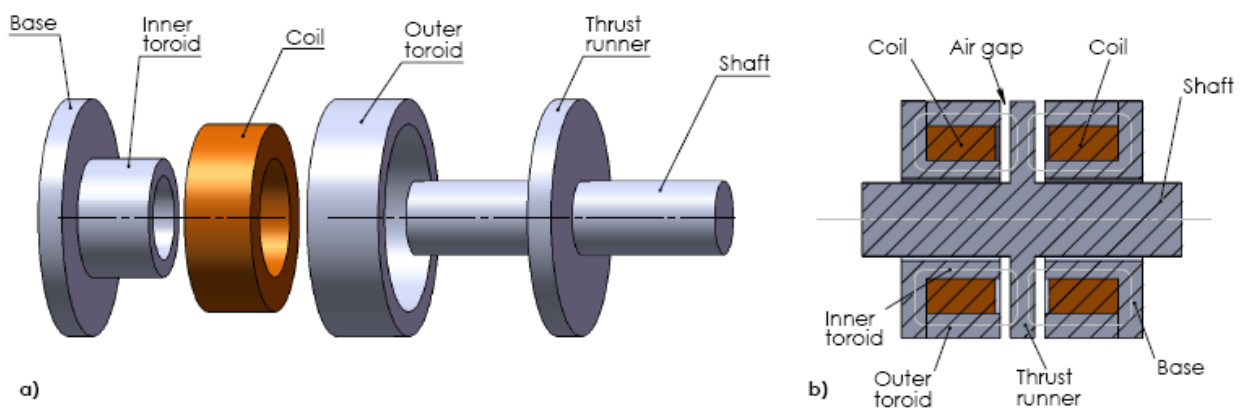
a) Exploded view of the thrust bearing b) Double acting thrust bearing
